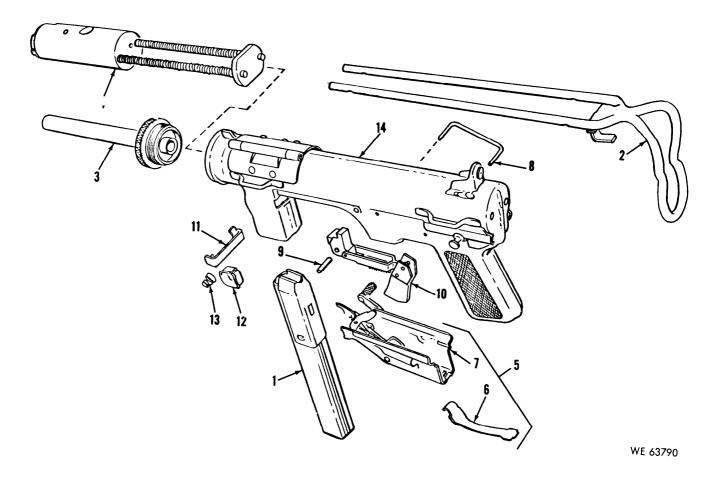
Submachine Gun, Caliber .45, M3 only-major groups, assemblies and component.
